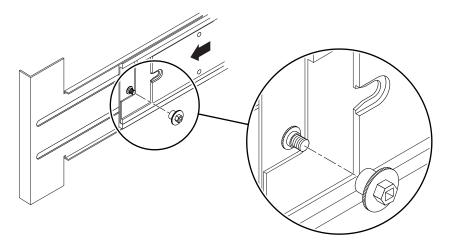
Inserting and Tightening the Slide Rail Locking Nut
